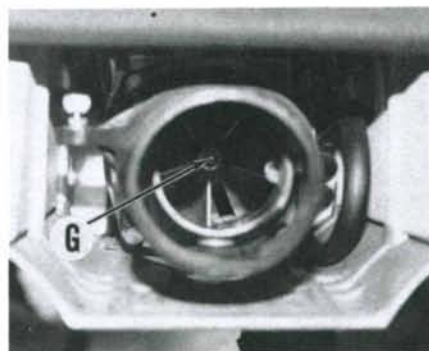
Jet pump drive shaft rear bushing is greased through grease fitting (G) at rear of jet pump housing.
